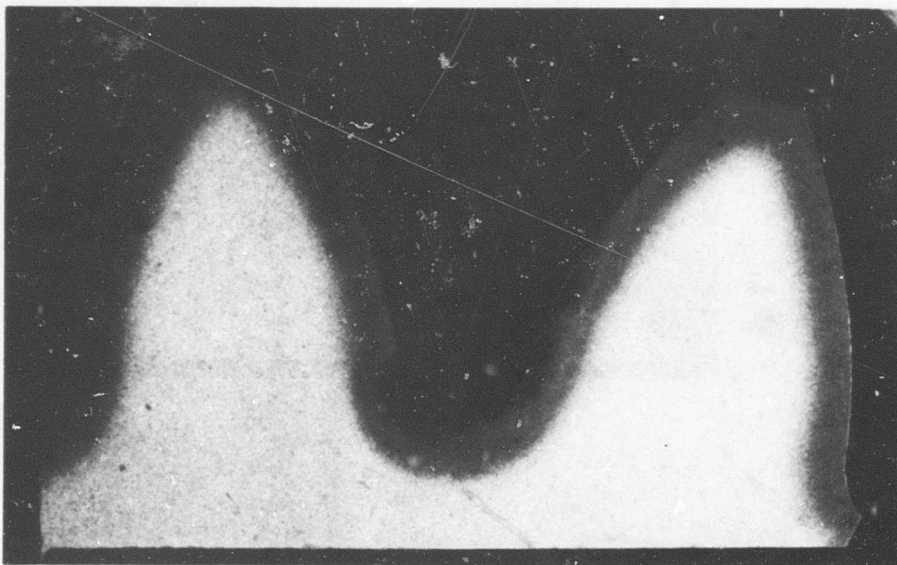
Photograph of Section Through Test Gear Showing Carburized Case Depth Around Root Fillet Contour.
